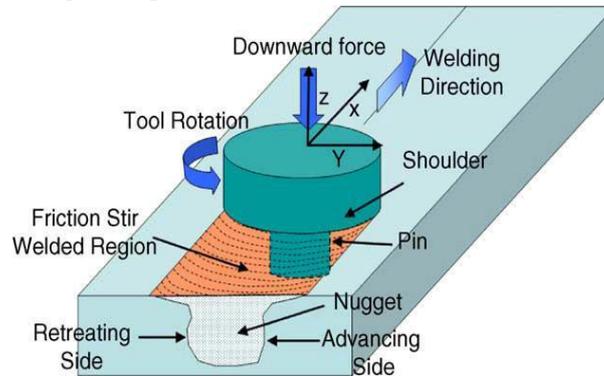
Schematic diagram of friction stir welding [5]
